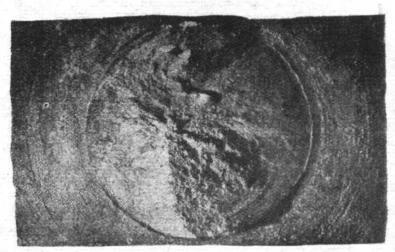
Fracture of crankshaft pin during straightening operation.
